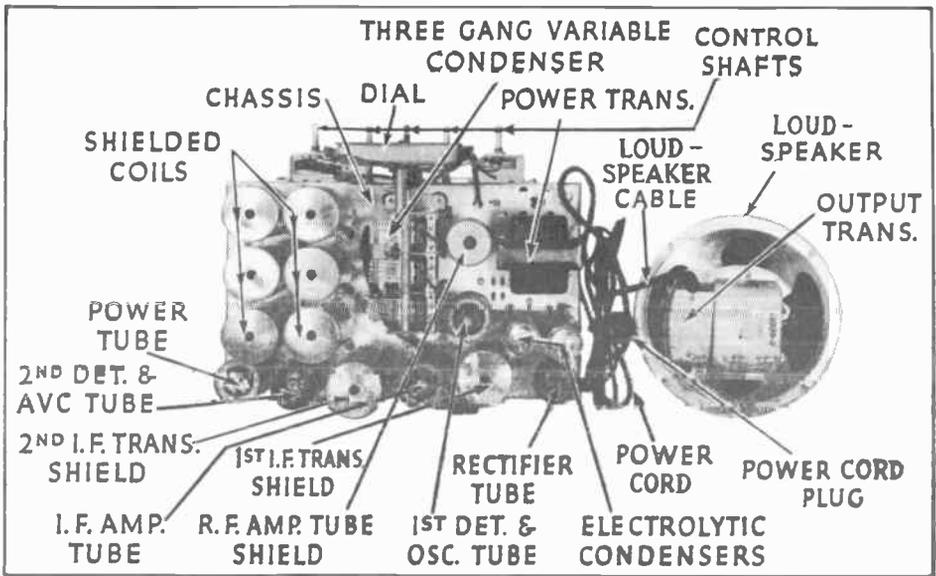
Top view of the chassis of the General Electric receiver used as our example, with important parts clearly labeled to assist you in identifying similar parts on your own set.
